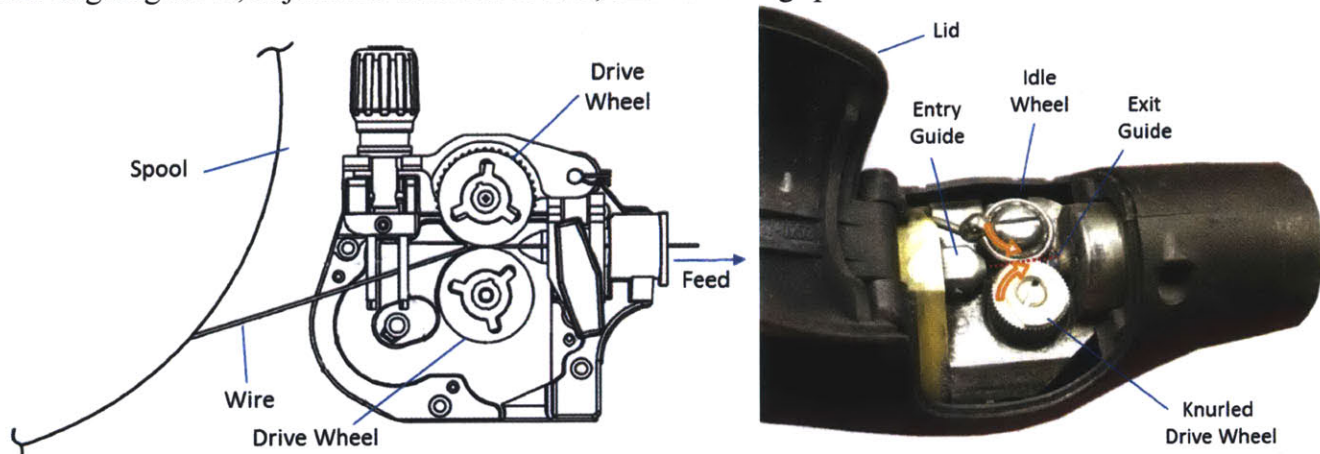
MIG welder wire feeders (U.S. Pat. No. 2013/0048621 A1) and Miller Python Push-Pull head for welding aluminum
